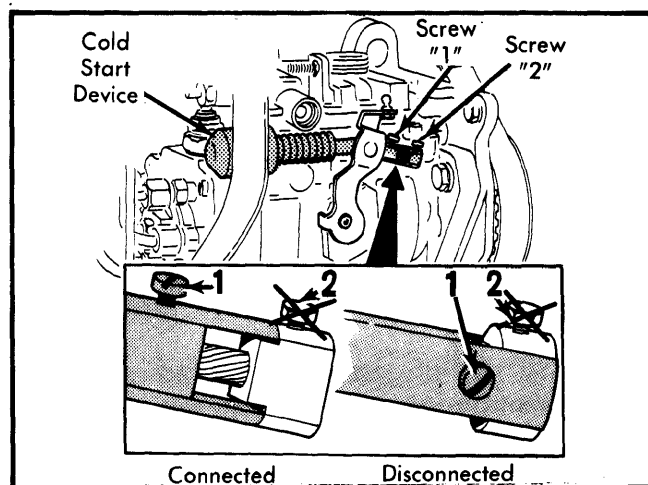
Disconnecting and Connecting Cold Start Device (Volvo Shown)
